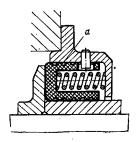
Axial seal with a packing sleeve held in housing 2 🖢 🖁
